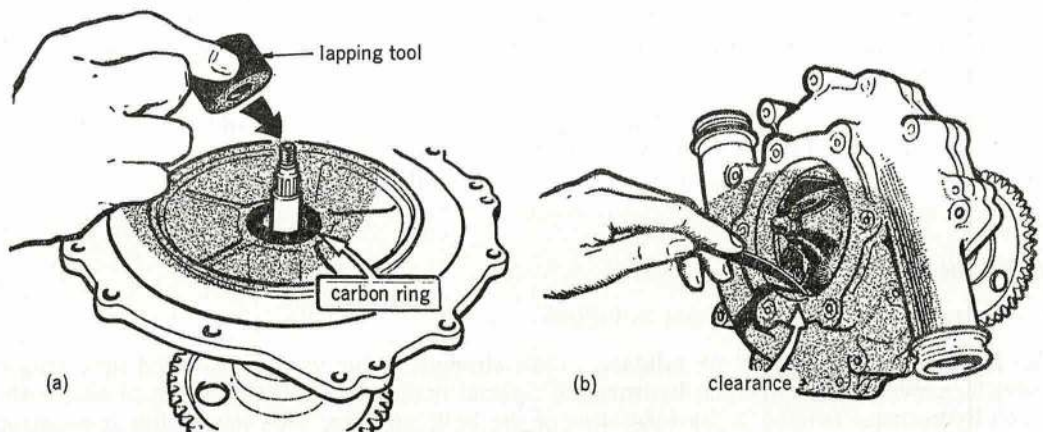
Using a lapping tool and checking rotor clearance
